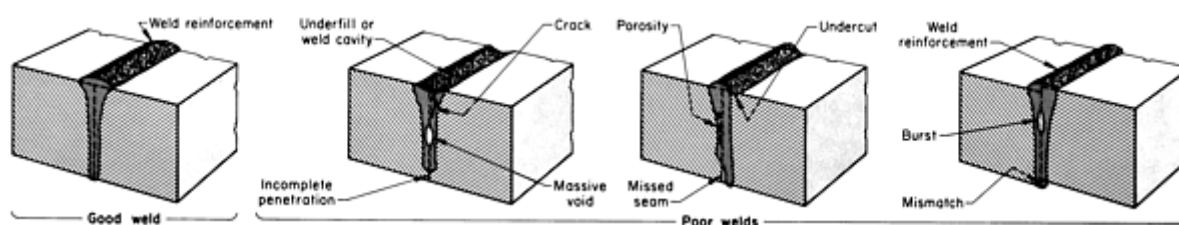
ELECTRON-BEAM WELDS SHOWING FLAWS THAT CAN OCCUR IN POOR WELDS AND THE ABSENCE OF FLAWS IN A GOOD WELD WITH REINFORCEMENT
